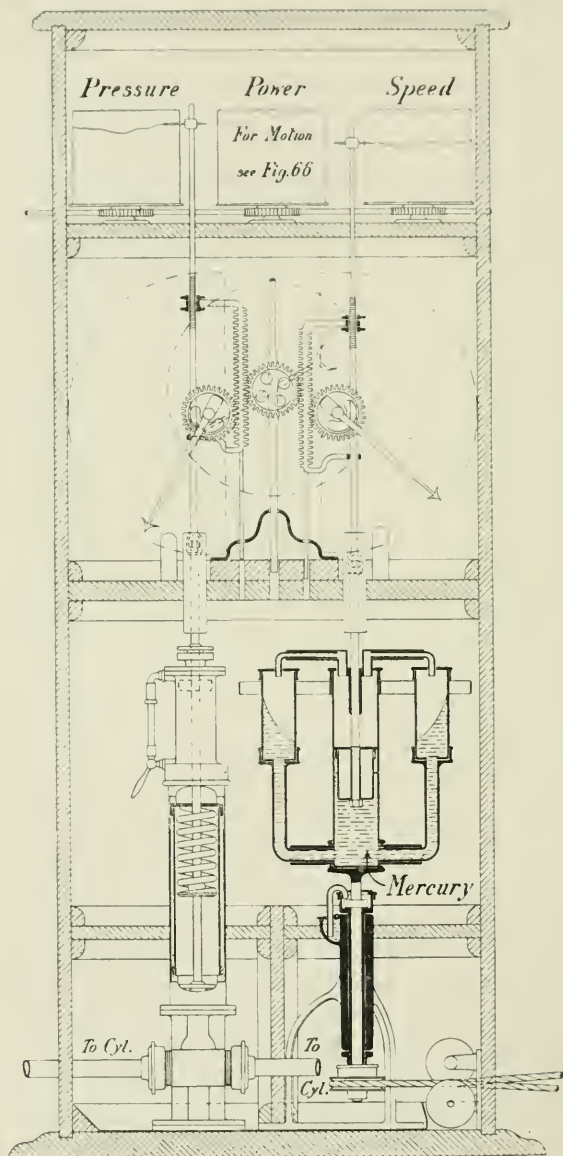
Design for a Dial Steam-Power Meter, 1877
